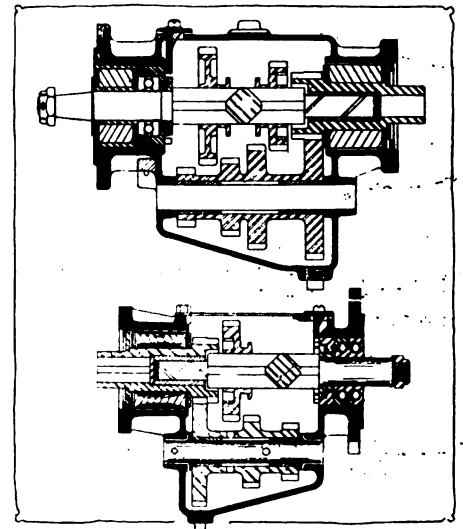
Lefever small car gearsets. The upper one has three speeds and is for machines up to 20 horsepower, while the lower is a two-speed design for cars of 15 horsepower or under
